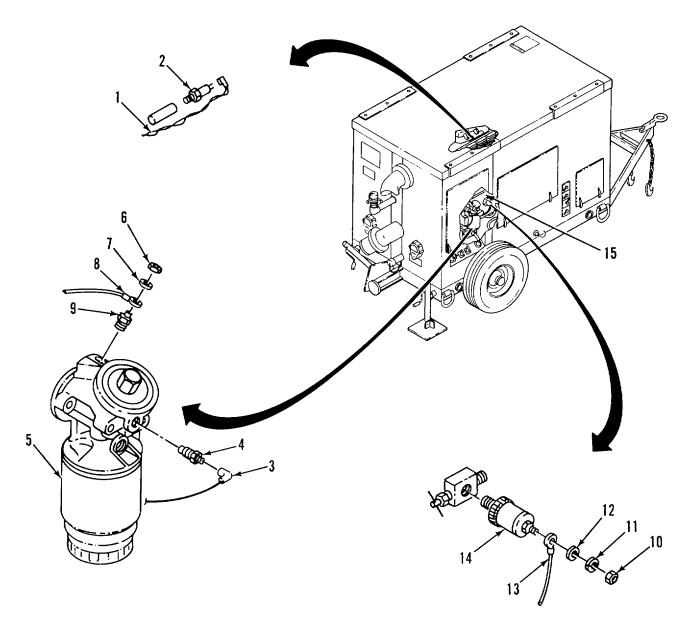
Engine Temperature and Oil Pressure Switches and Senders
